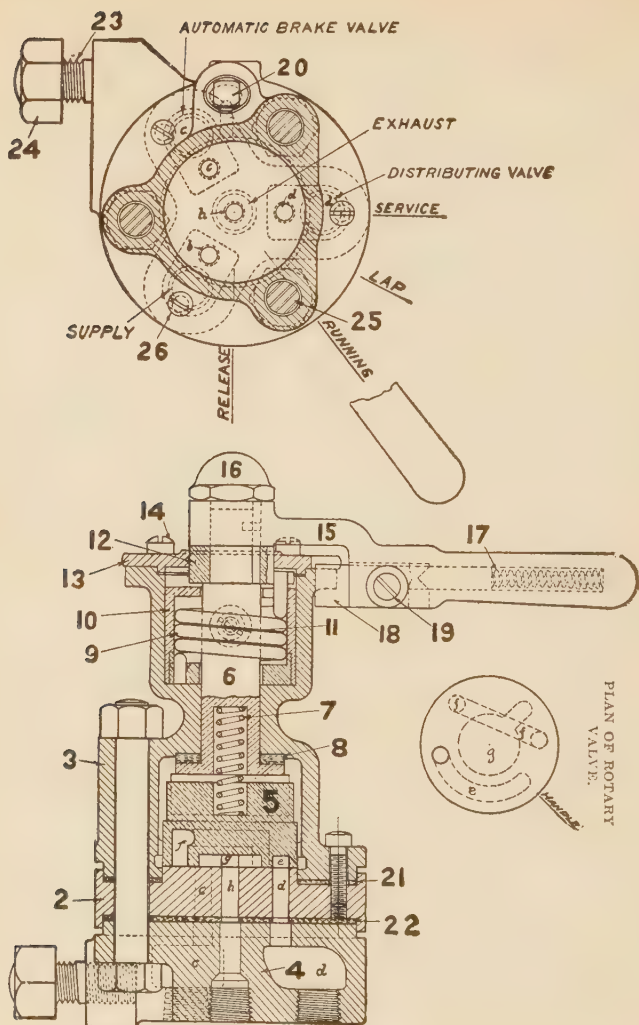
INTERIOR VIEWS OF THE INDEPENDENT BRAKE VALVE
